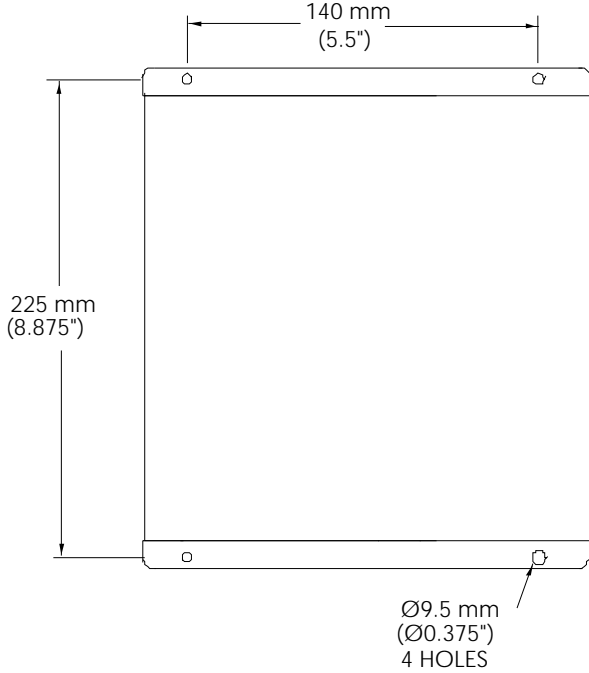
Location of Mounting Holes for AMC-1DMB-AO
